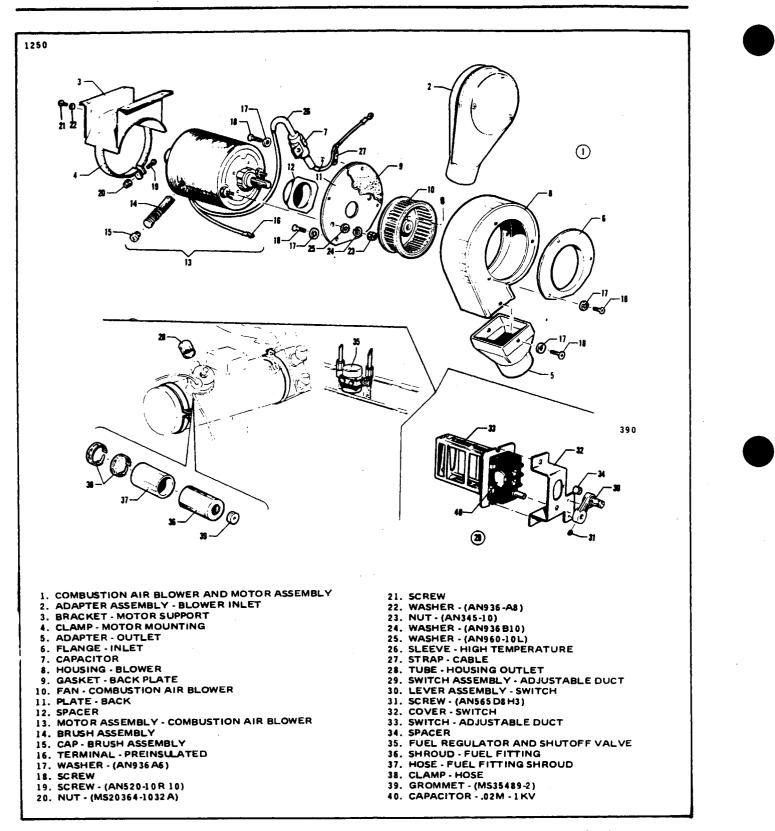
Combustion Air Blower and Motor Assembly 41D07, System No. 1
